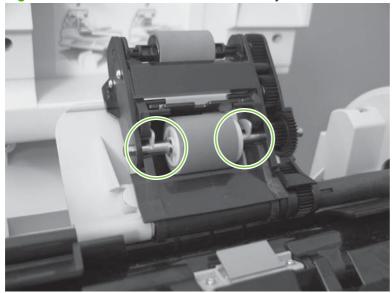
Remove the ADF roller assembly and separation pad (5 of 5)
